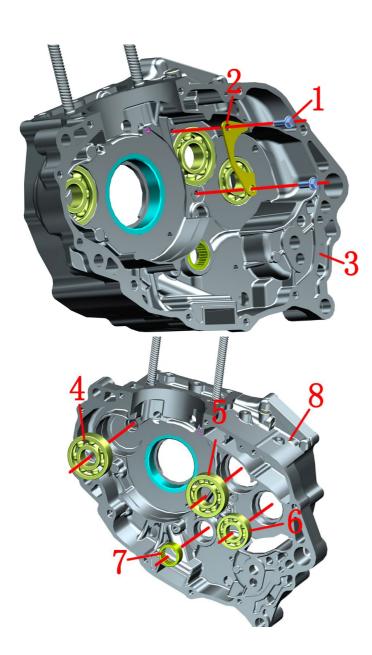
RIGHT CRANKCASE ASSEMBLY		Right box assembly-3	CHK	<b>Q</b>
